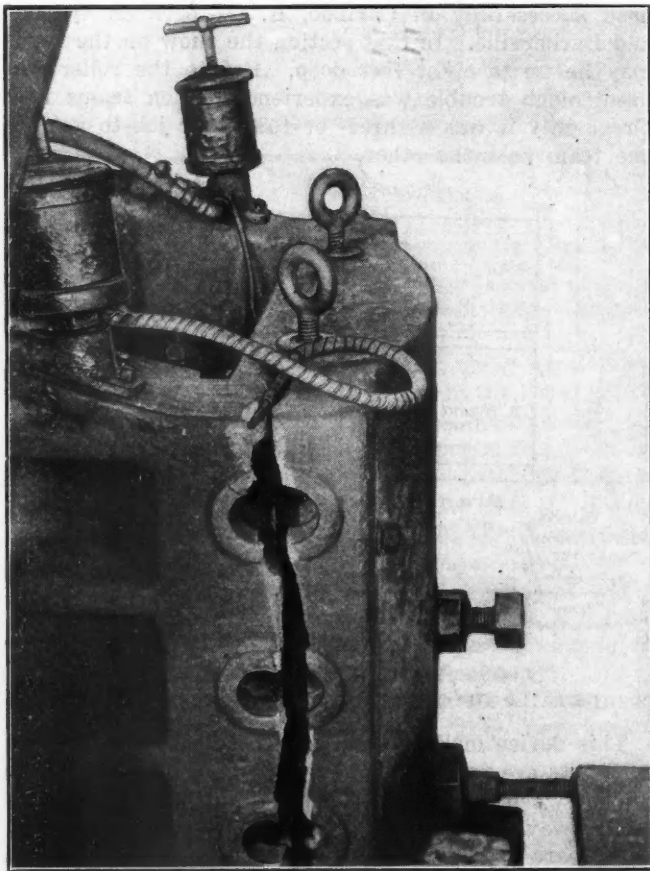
BROKEN CASTING ON JAW CRUSHER
